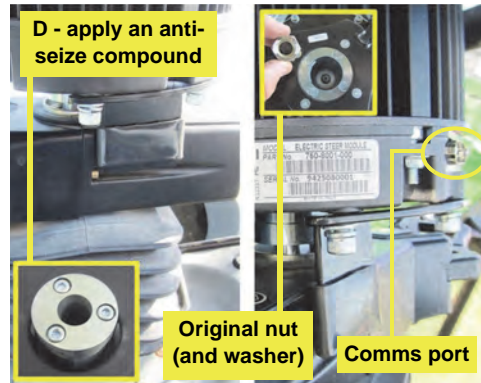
with insets: Steering wheel and anti-rotation brackets installation
